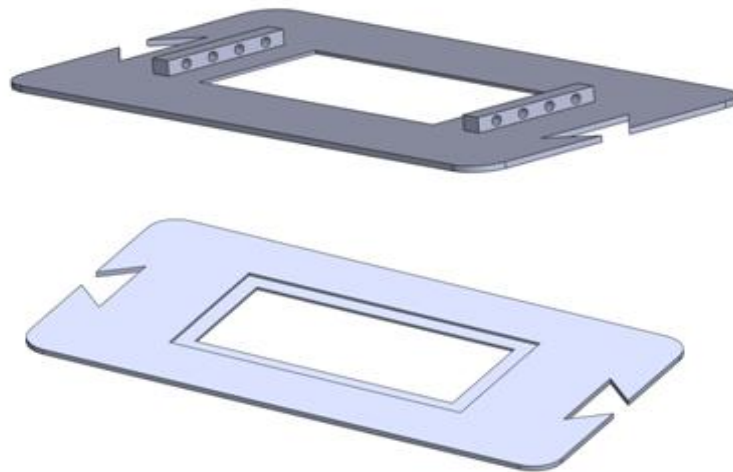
SolidWorks™ drawing for the device holder top and bottom custom designed to fit into a microscope stage
